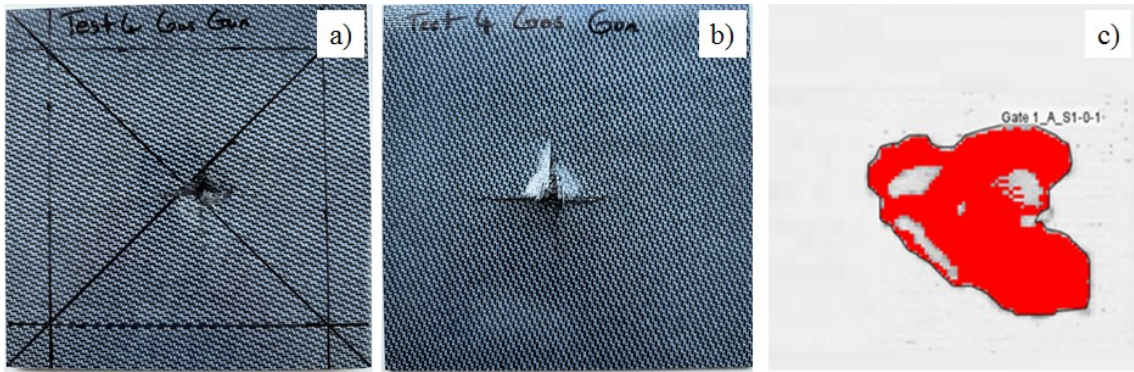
Gas gun impact test specimen-3 after impact; a) front face, b) back face, and c) C-scan image for damage assessment
